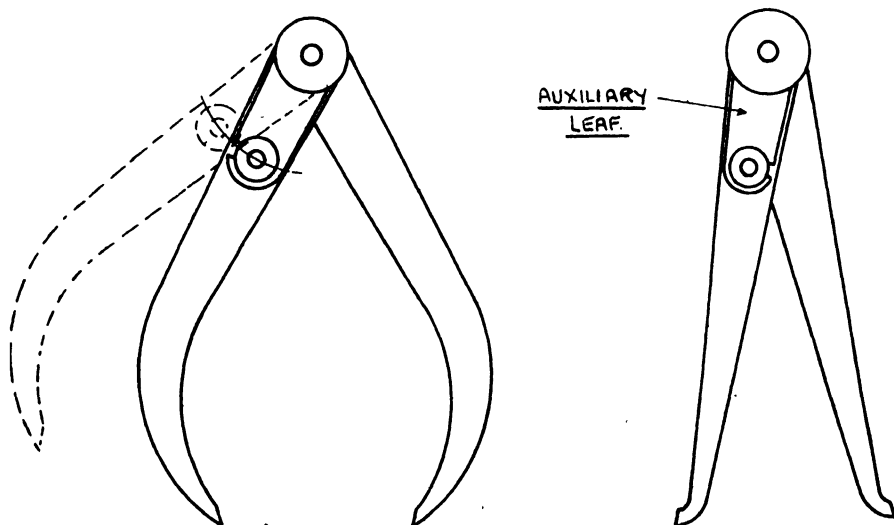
LOCK-JOINT TRANSFER CALIPERS
